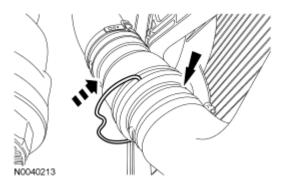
Locating Halfshaft Circlip Courtesy of FORD MOTOR CO.
